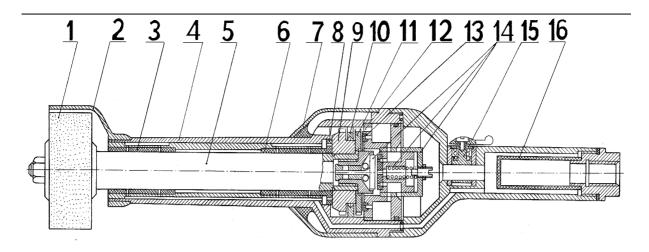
Design of the air grinding tool Mod. BΠΜШ 150.01
